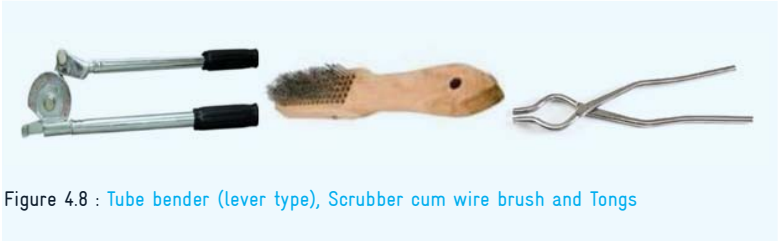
Tube bender (lever type), Scrubber cum wire brush and Tongs
